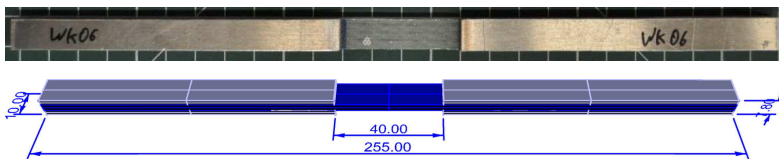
WL coupon geometry with straight gauge section and bonded aluminium tabs. 3 mm thick.
